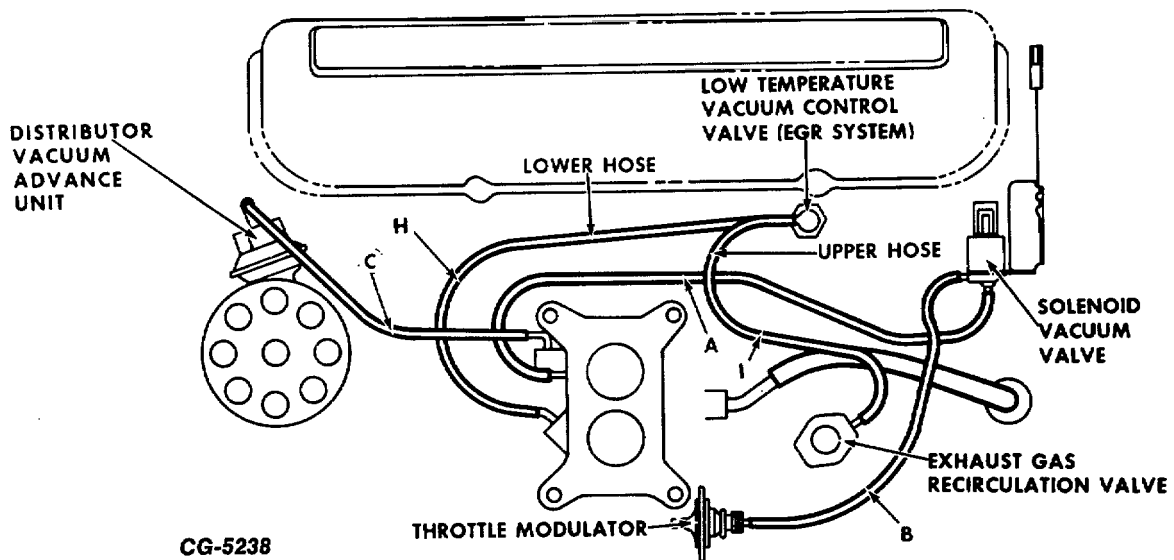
Vacuum Hose Locations on V-304;345 Engines With 2210C Carburetor in Scout Vehicles (Sold in Canada)
